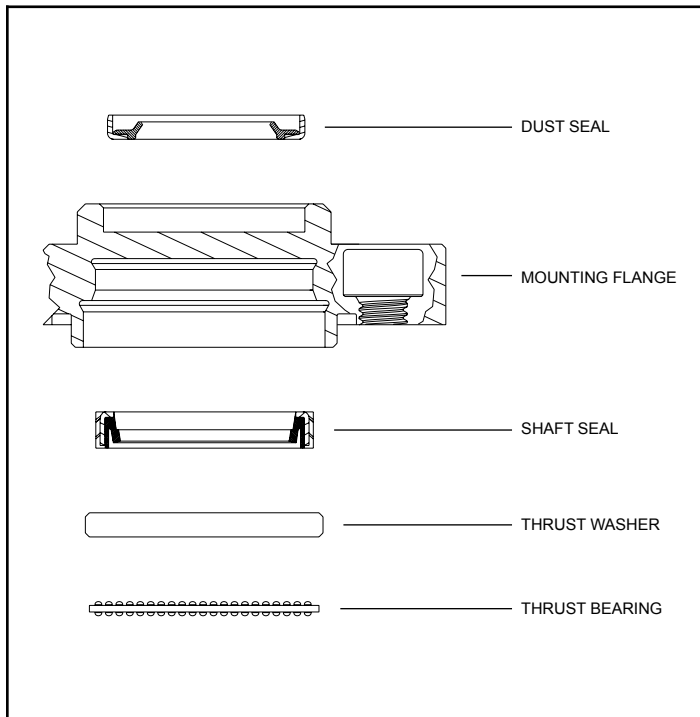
MOUNTING FLANGE / SHAFT STACK UP
